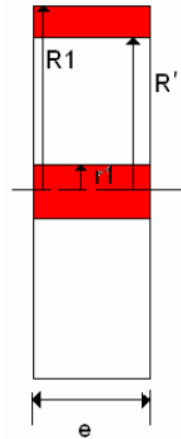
Dimensions considered for Gears remanufacturing. Govetto, 2008
